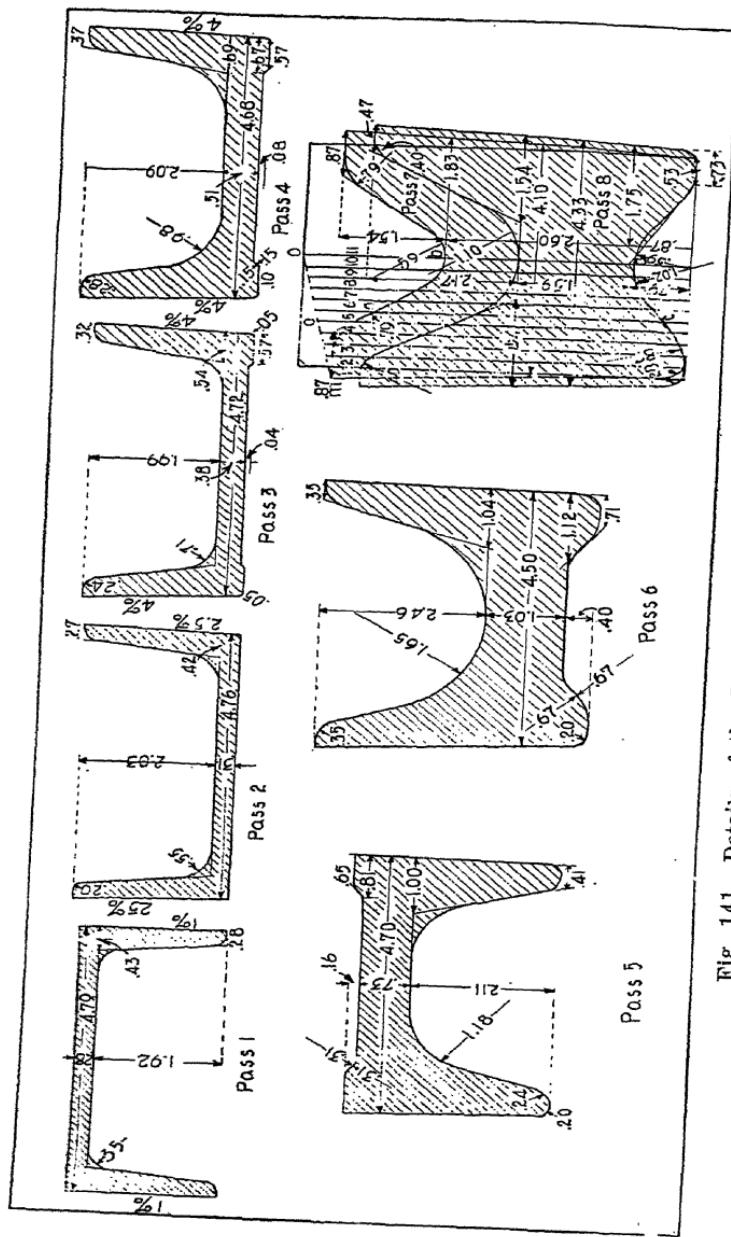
Details of the Pass Design of a 4.724-Inch Channel
